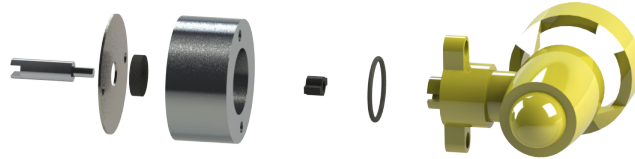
Motor mount exploded view. From left to right: aluminum shaft, backing plate, lip seal, motor mount, acrylic adapter, O-ring, thruster
